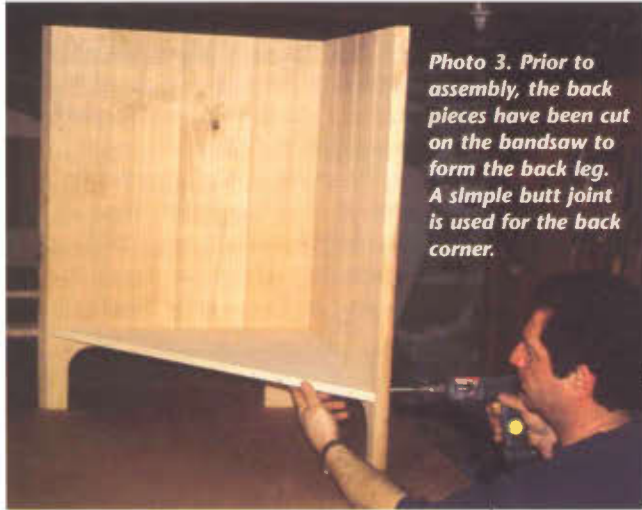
Prior to assembly, the back pieces have been cut on the bandsaw to form the back leg. A simple butt joint is used for the back corner.
